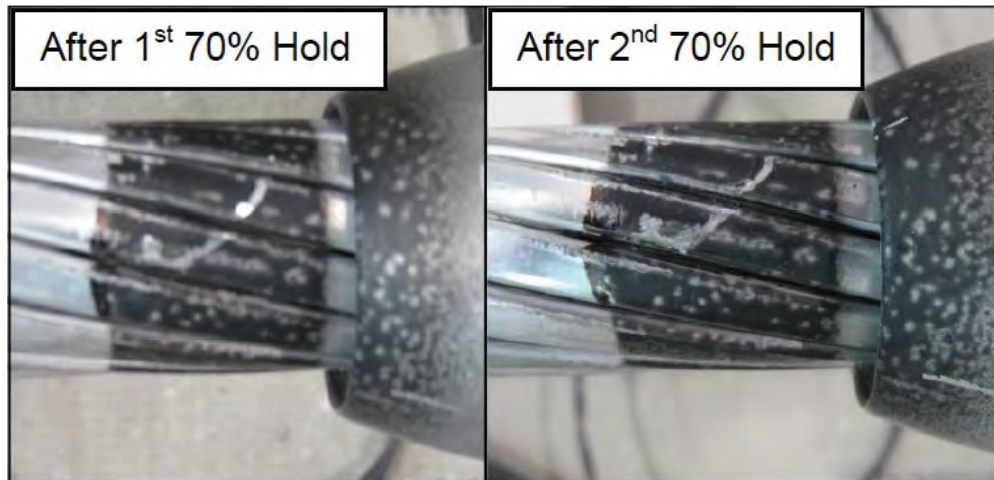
Movement at Mouth of North Dead-end Connector after 70% RBS Holds
